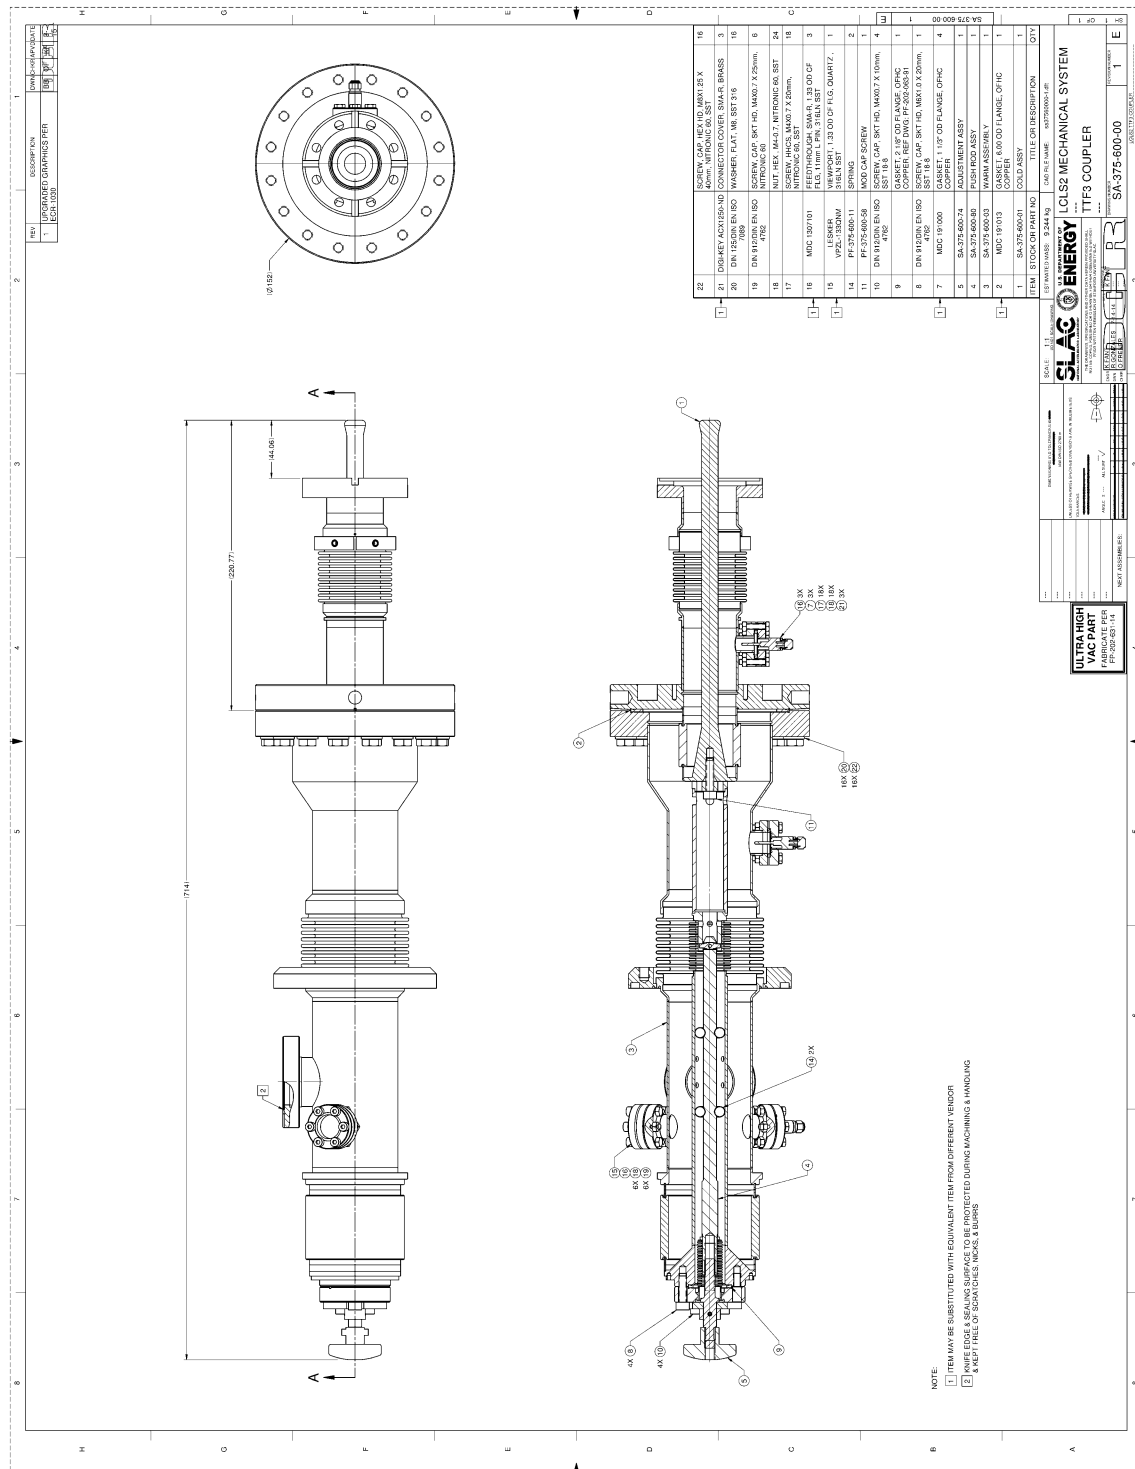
The LCLS II Fundamental Power Coupler Sub-Assembly drawing, produced by SLAC in 2014 at the start
